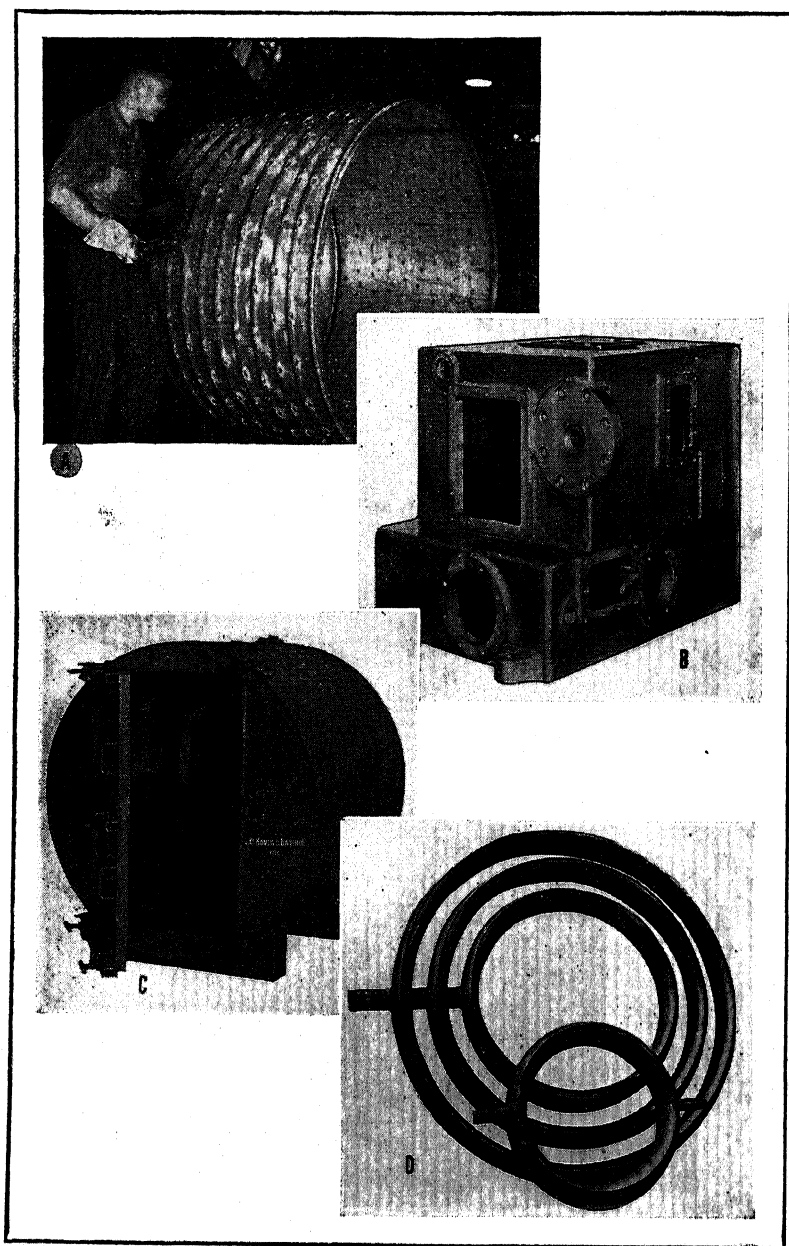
CONTAINERS—(A) Inside tank for pasteurizer. (B) 400-lb. tank for process machine. (C) Steam-treating chamber for processing of silks. (D) Cooling coils for milk pasteurizers.
